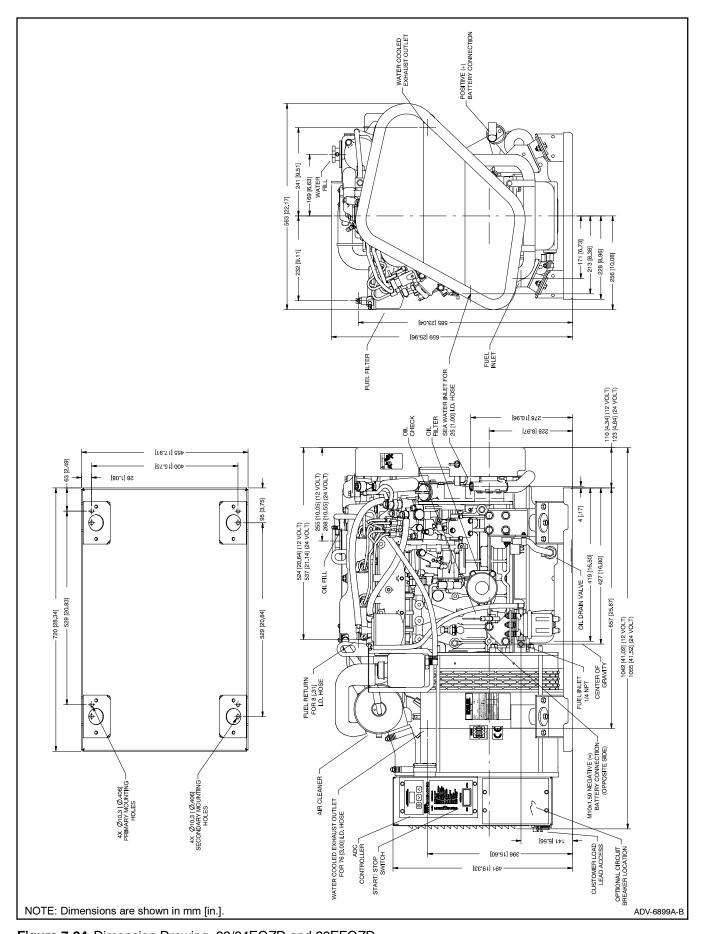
Dimension Drawing, 23/24EOZD and 20EFOZD
